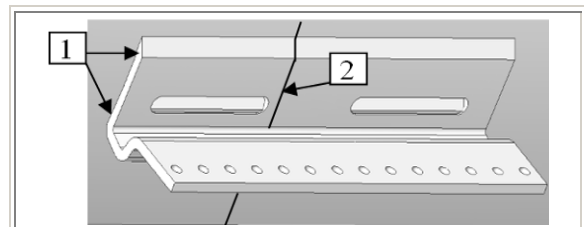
Model of pad. Scheme of pads' cracks: 1-in transversal seam, 2-in the barrel shell
